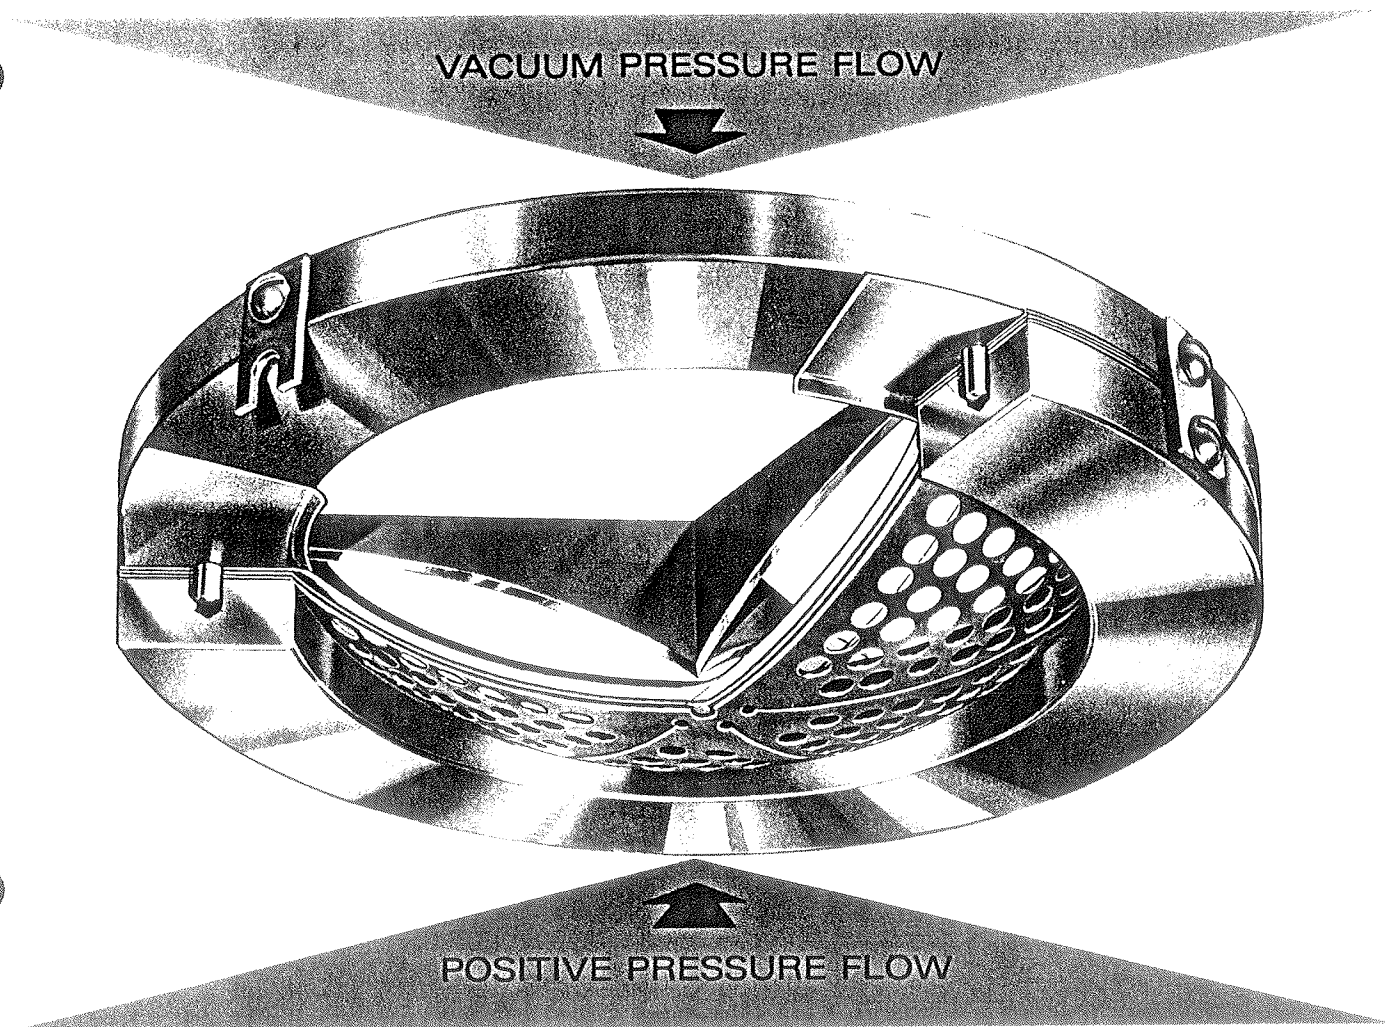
EXPLODED VIEW OF A POS-A-SET RUPTURE DISK
